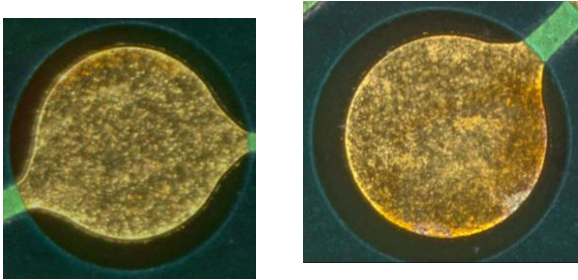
Typical discoloration after hand solder (left) and after parylene coating step (right).
